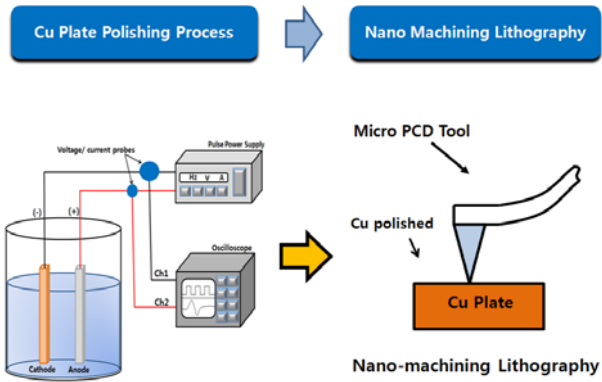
Experimental of micro mold fabrication process using ECP and PCD tools
